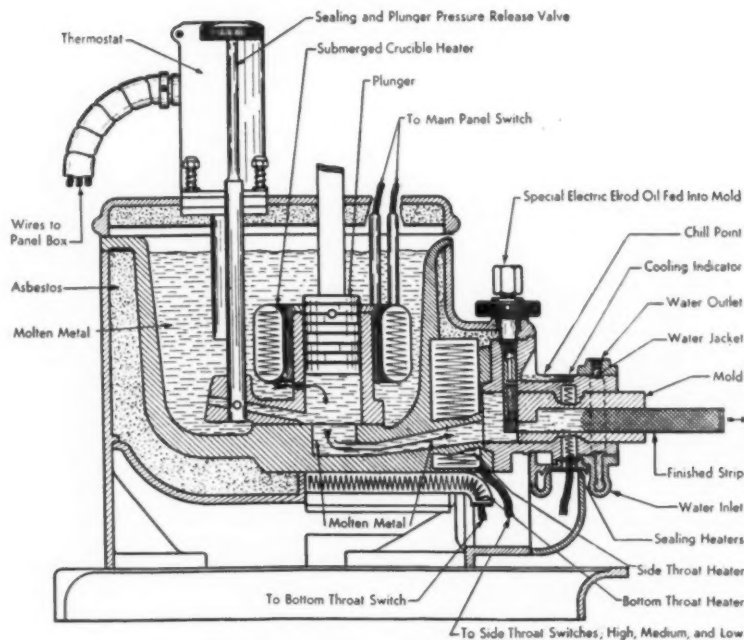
"ELROD" CONTINUOUS STRIP-CASTING MACHINE
